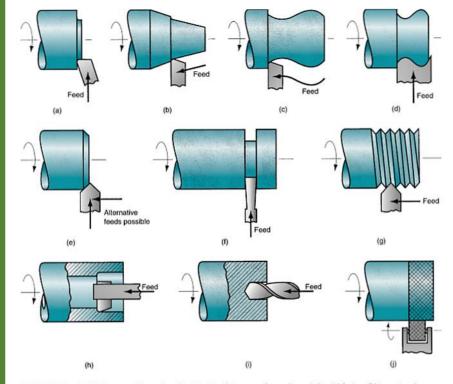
Machining operations other than turning that are performed on a lathe: (a) facing, (b) taper turning, (c) contour turning, (d) form turning, (e) chamfering, (f) cutoff, (g) threading, (h) boring, (i) drilling, and (j) knurling.
